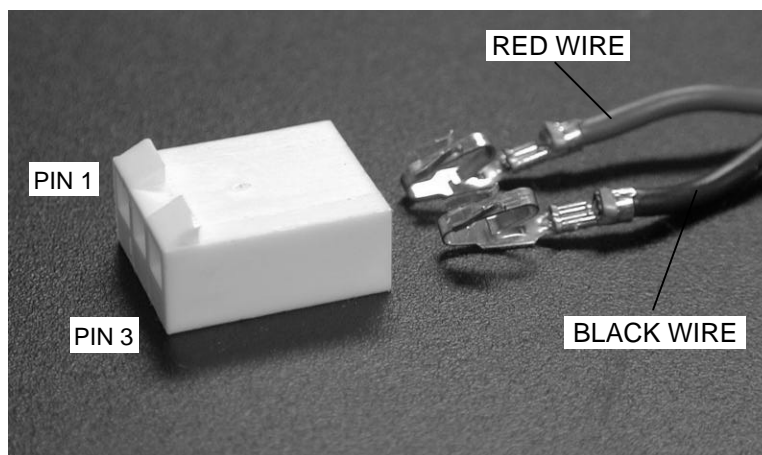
3 Pin Connector Housing and Wires ready for Assembly
